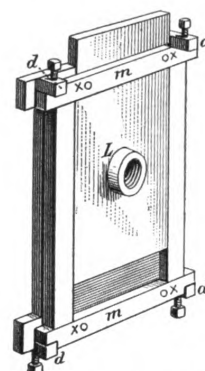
Rear View of Chuck Shown in Fig. 15.
